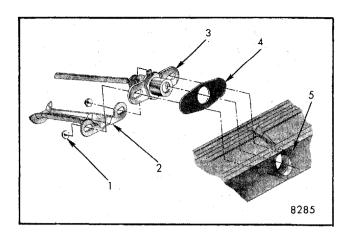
Rear Compartment Lid Lock Cylinder - Chevrolet F Styles
